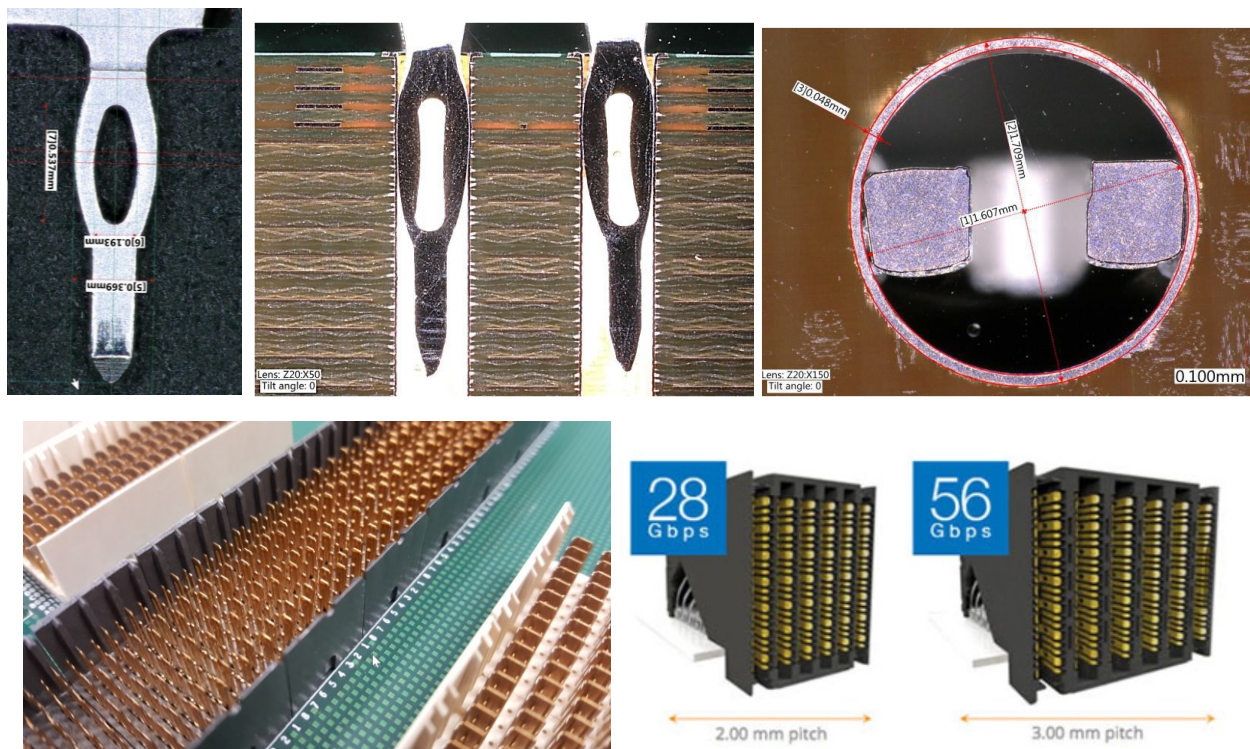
EON (Eye of Needle) Style Compliant Pin and Cross-Sectional View within PCB. Press fit Connectors Installed on PCB (Courtesy of Flex) and ExaMAX High Speed backplane connectors
